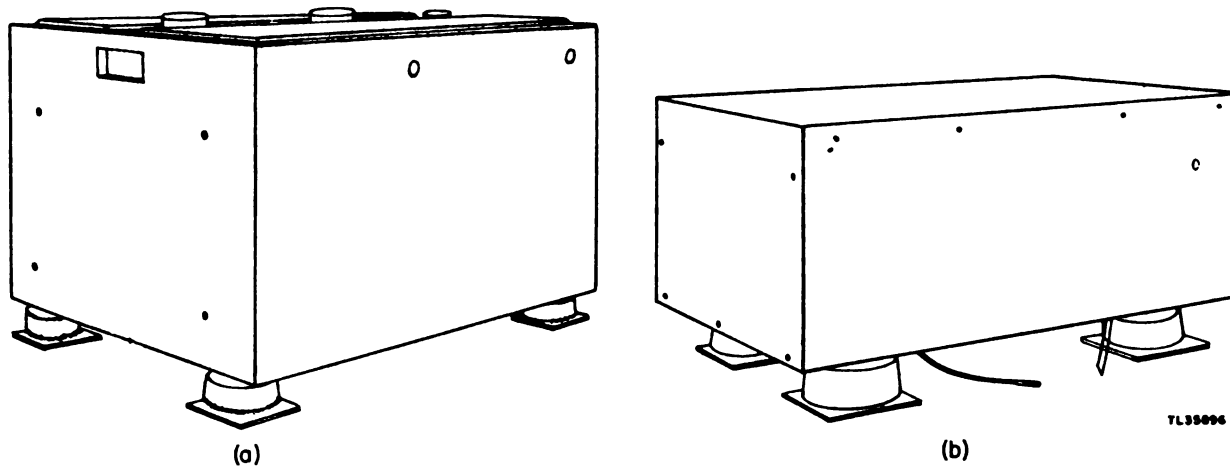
Transmitter-Receiver Assembly and Dynamotor Unit PE-94-A or PE-98-A.
